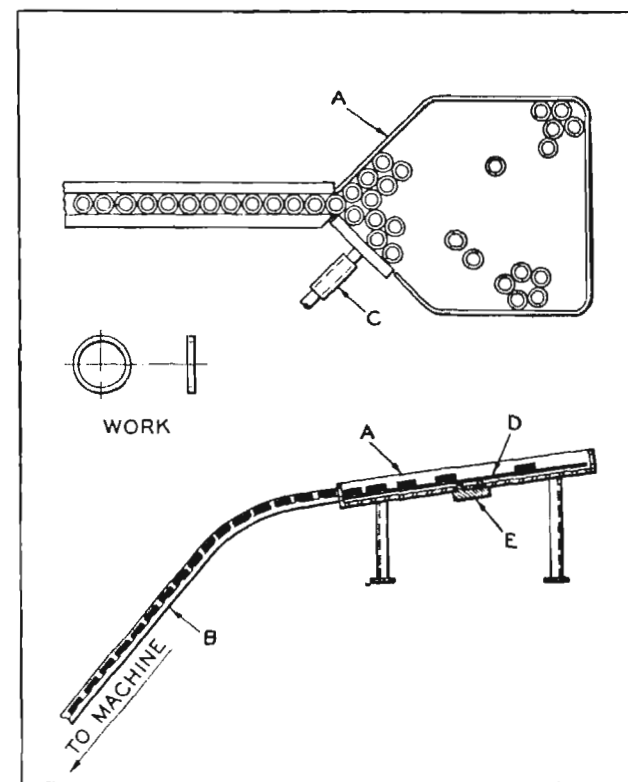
Tray Hopper for Feeding Large Parts to Machines at Comparatively Low Production Rates.
